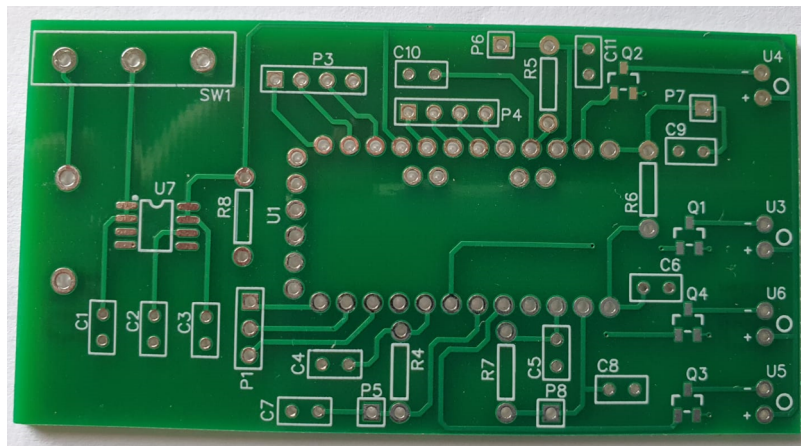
Front Image of Physical PCB used for Prototyping.
